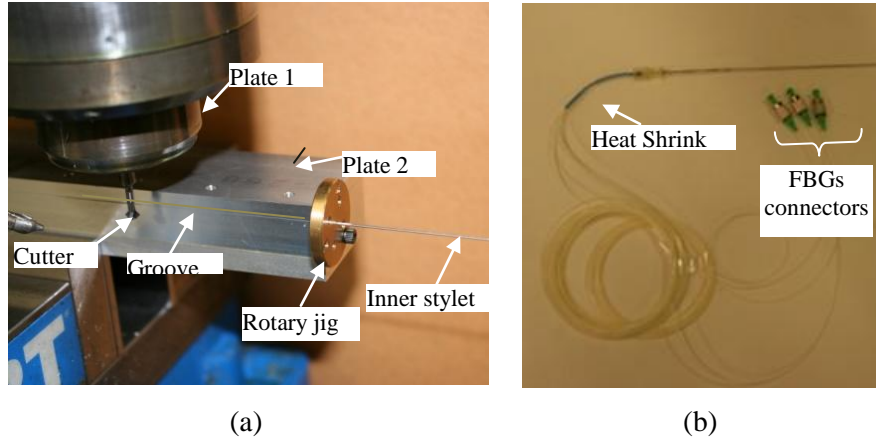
(a) Jigs and milling machine for making three grooves along the 0.6 mm needle at 120-degree configuration, (b) Needle prototype.
